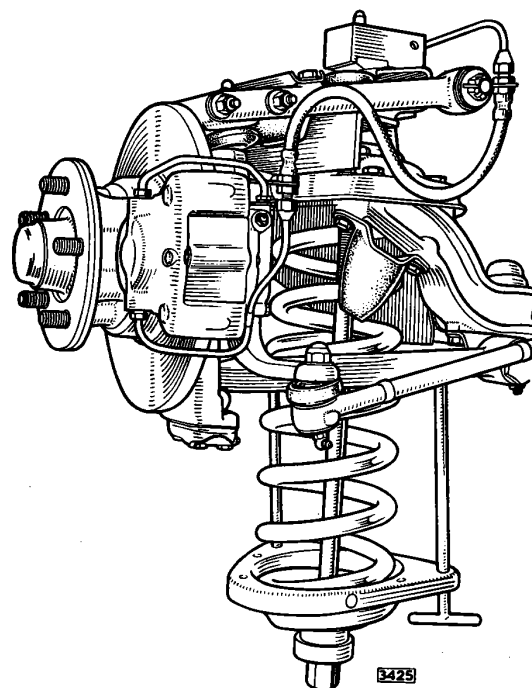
Removing the coil spring using Tool No. JD.6B.
